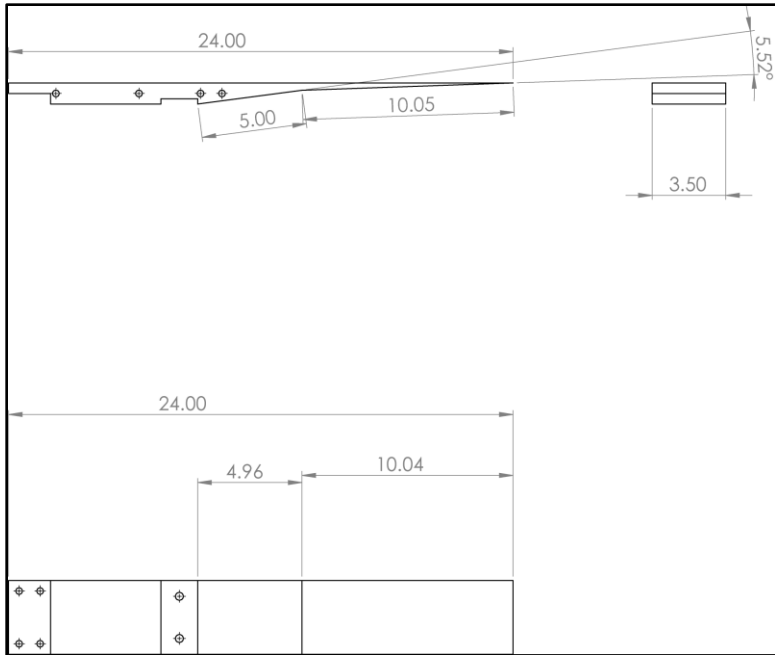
Diffuser Base Angled Housing For Diffuser Block, Drawing
